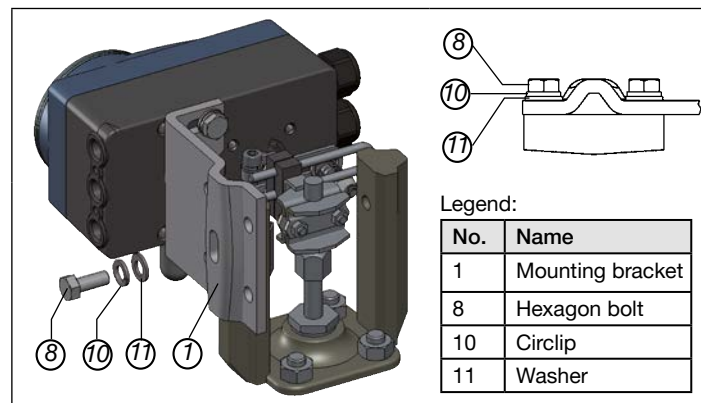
Attach Type 8792/8793 with mounting bracket; for actuators with cast frame
